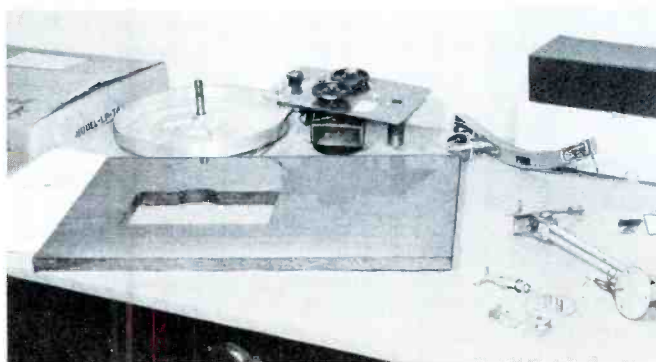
Finished Motor Board Ready for Mounting of Turntable and Arms.
